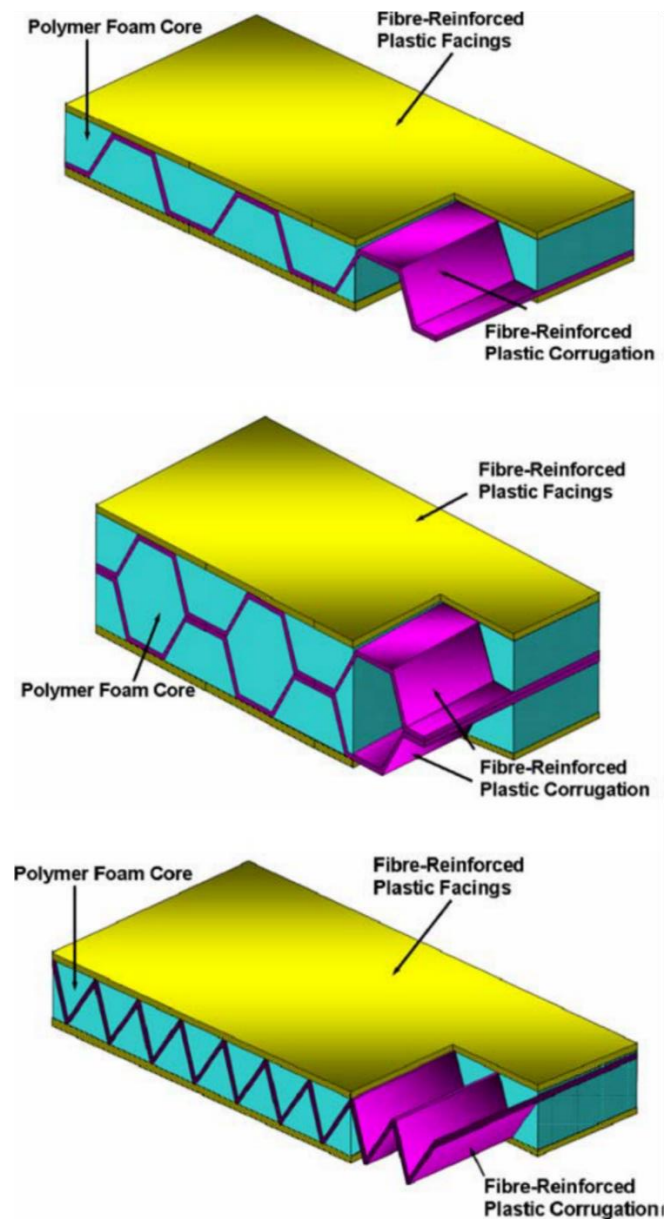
Examples of different sandwich material core constructions (Zangani et al. 2007)
